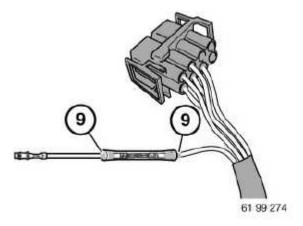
Identifying Shrink-On Sleeve Courtesy of BMW OF NORTH AMERICA, INC.
